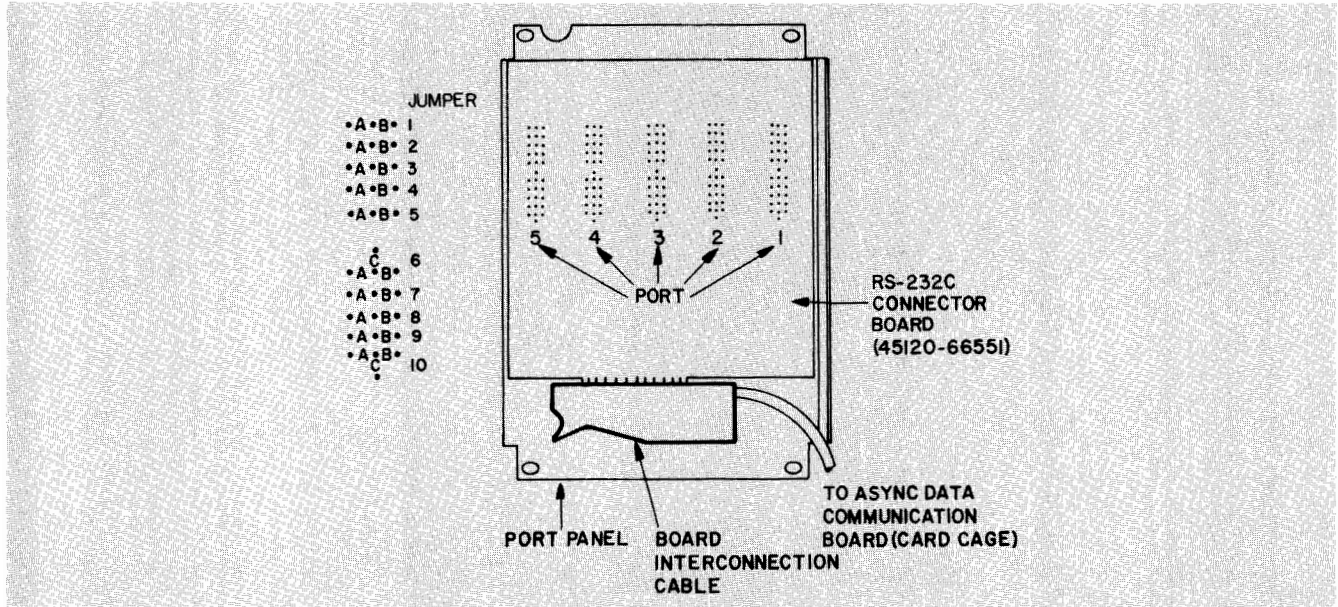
RS-232C Connector Board Assembly (rear view)
